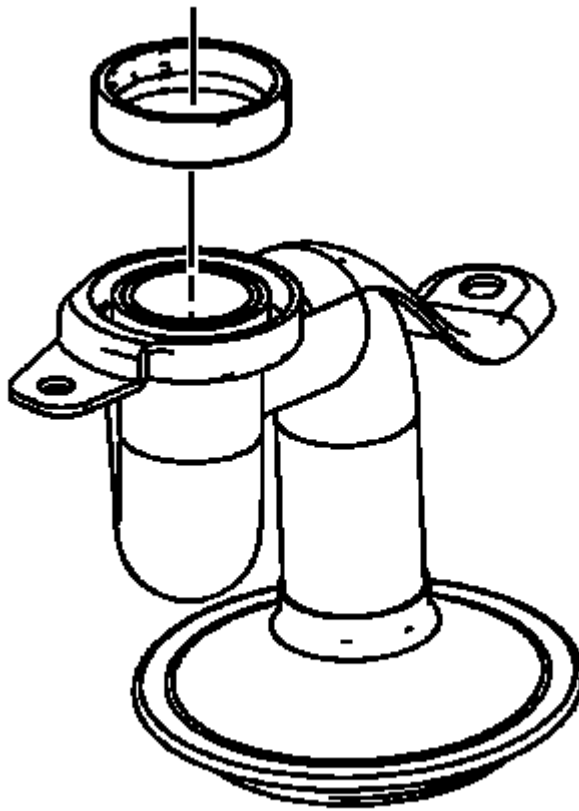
View Of Oil Suction Tube Seal & Oil Suction Tube
